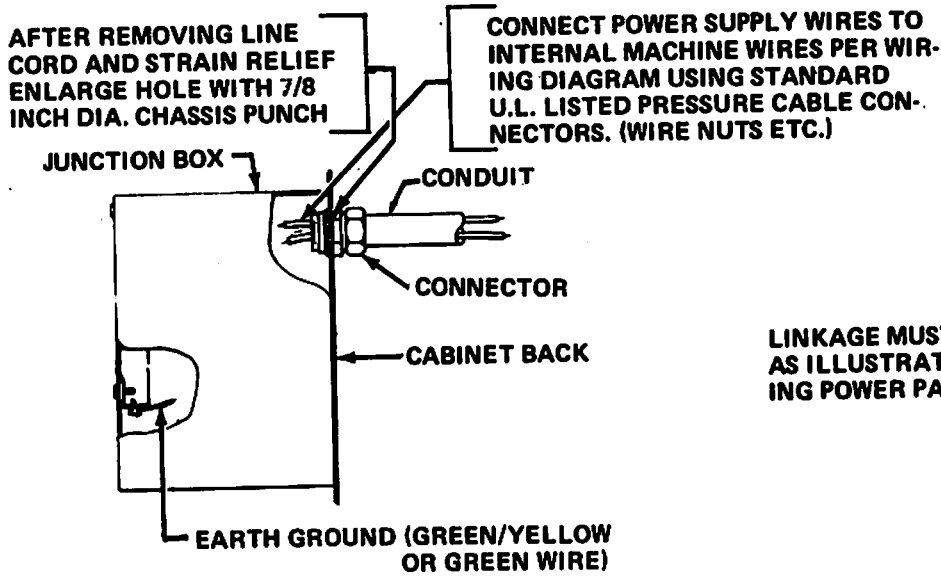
INSTALLATION OF 1/2 INCH CONDUIT
